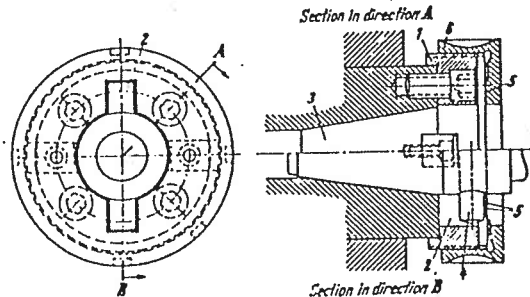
Milling spindle nose. 1—Driver with machined slots; 2—Arbor with driving peg 4; 5—Clamping nut; 6—Clamping nut.
